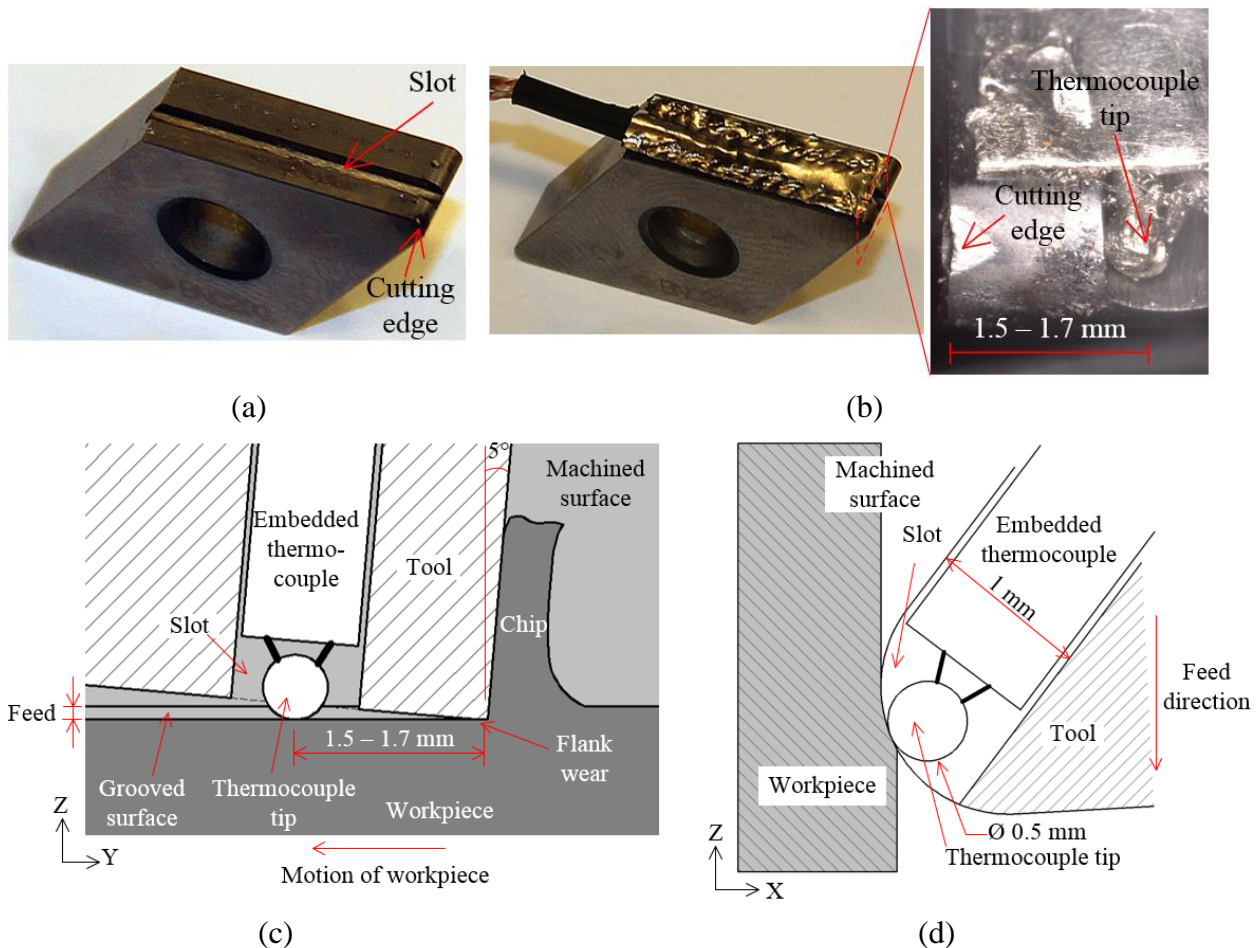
Cutting tool with embedded thermocouple: (a) slot grinded for thermocouple insertion, (b) cutting tool with thermocouple and aluminum protection, (c) interface between the embedded thermocouple tip and the machined surface, and (d) the contact between the micro-thermocouple tip and grooved machined surface.
